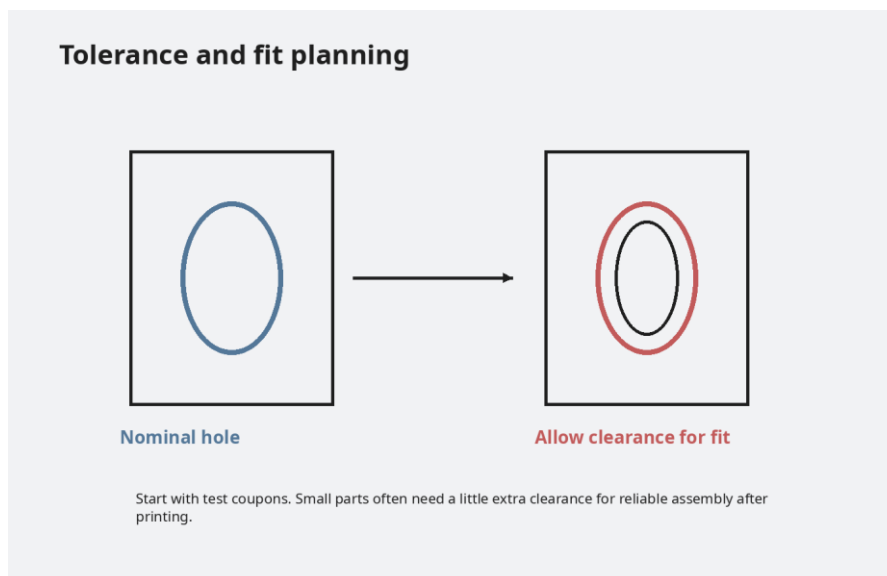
Printed assemblies need deliberate clearance and test-fitting.
